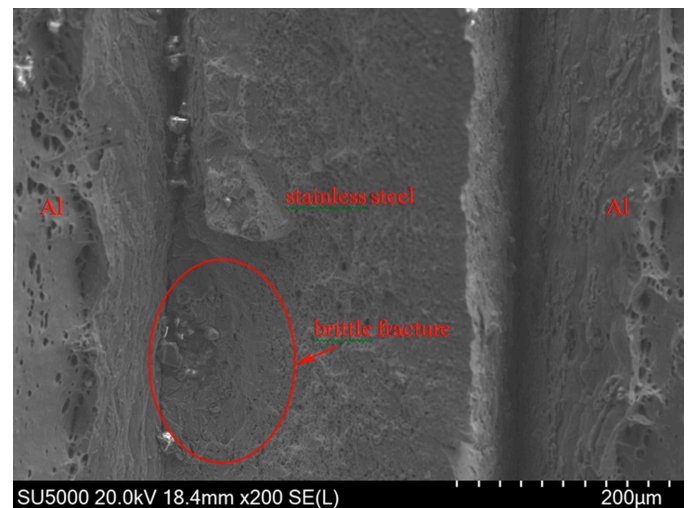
The tensile fracture morphology of the multilayer composites obtained by explosive welding with explosive of 20 mm thickness
